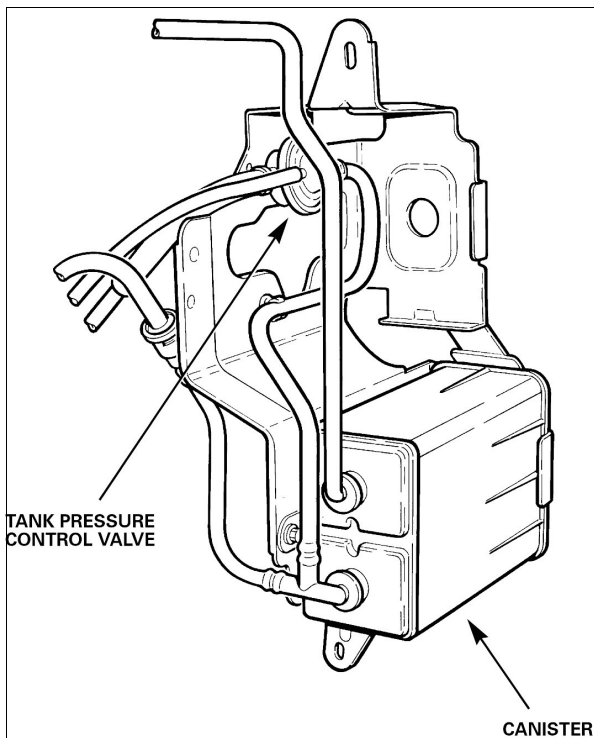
EVAPORATIVE CANISTER ASSEMBLY XK8
